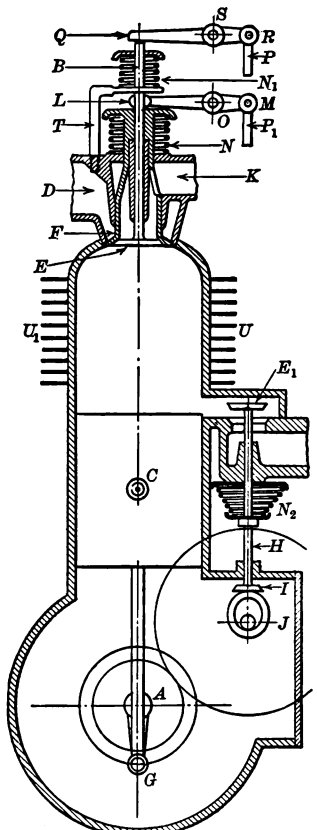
COMPOUND POPPET VALVES AND AUXILIARY EXHAUST VALVE ON FOUR-STROKE ENGINE
